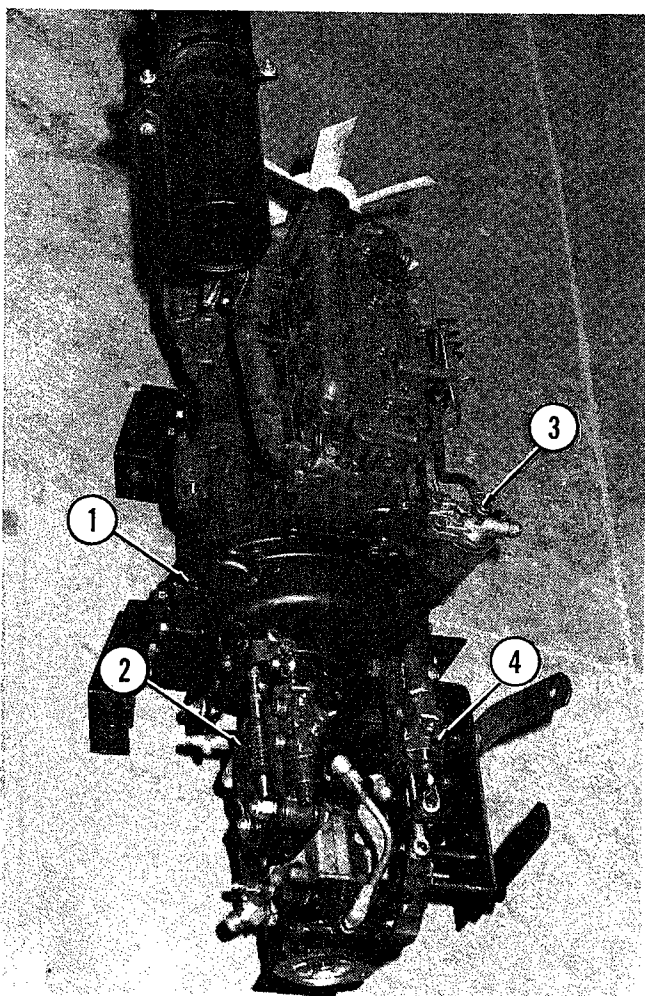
Hydraulic & Hydrostatic Systems with Overhead Guard Rolled-back and Locked and Floorplates and Consoles Removed
